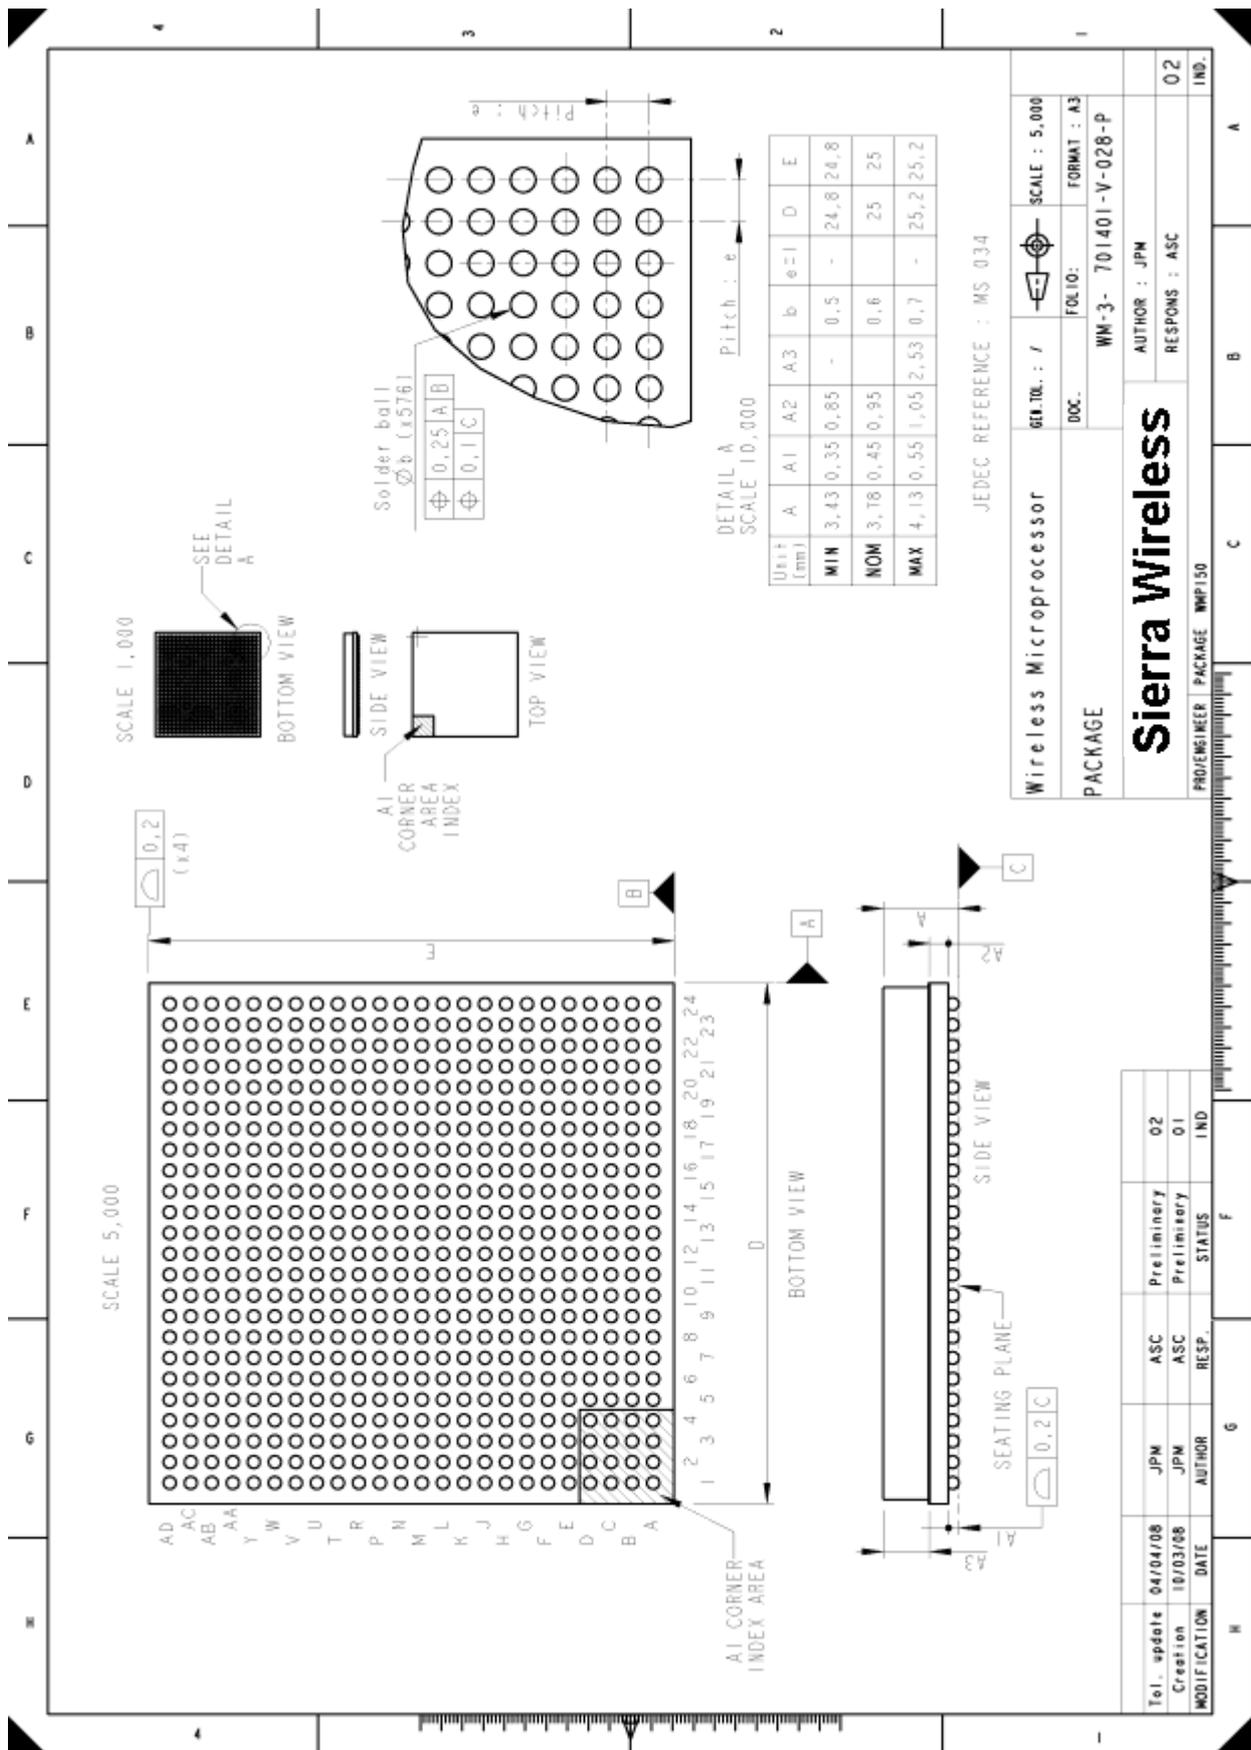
Mechanical Drawing of WMP150 (Bottom View)
